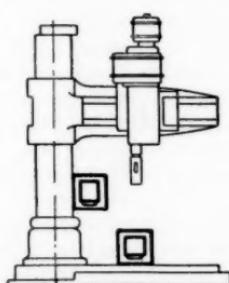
Column of radial drill, perpendicular to base plate. (Lengthwise).
